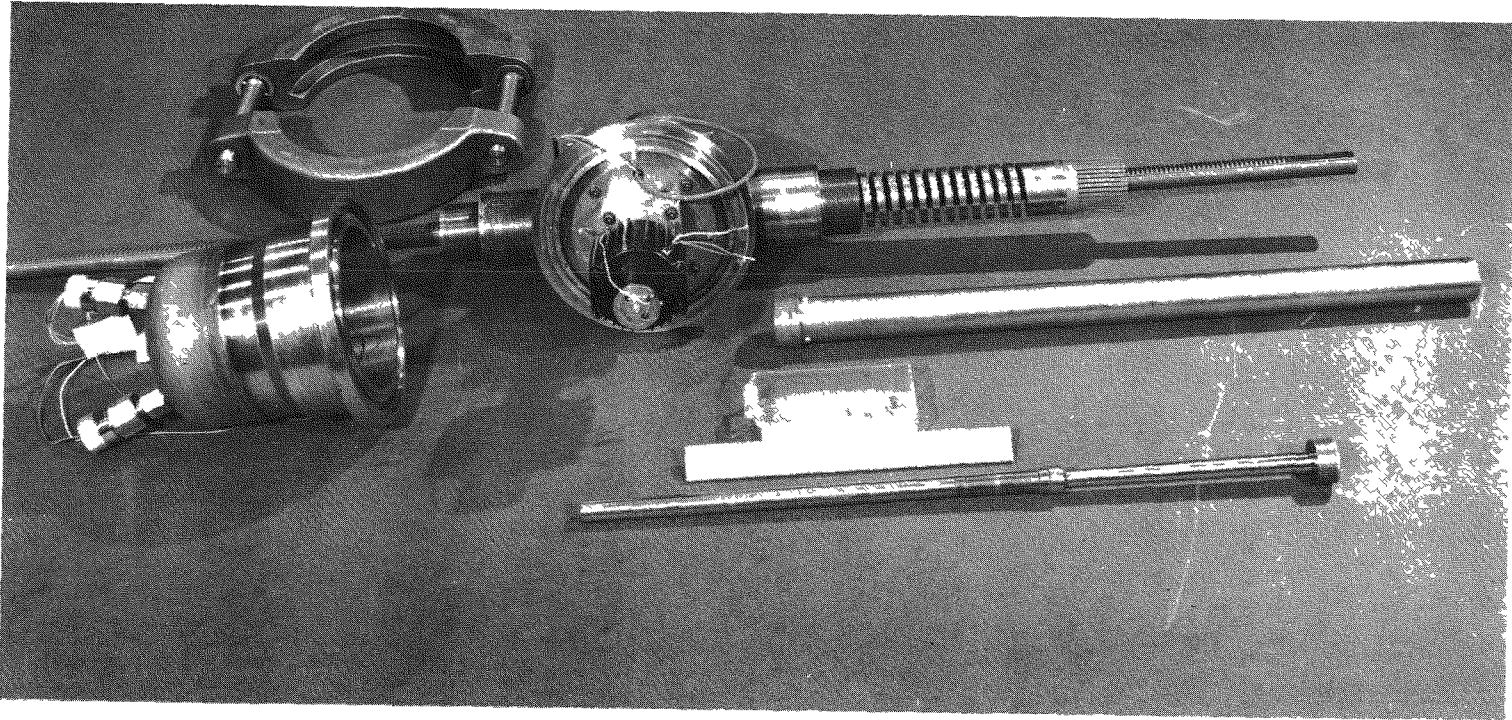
Disassembled prototype plug rod drive
